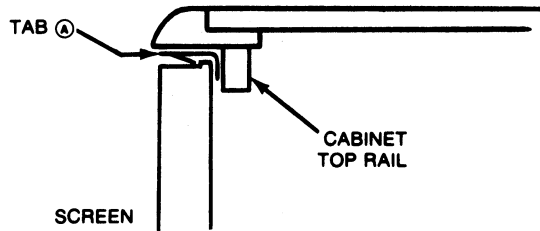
Cabinet Detail (Screen Removal) Models: 46GW950, P46100/150, P52150
